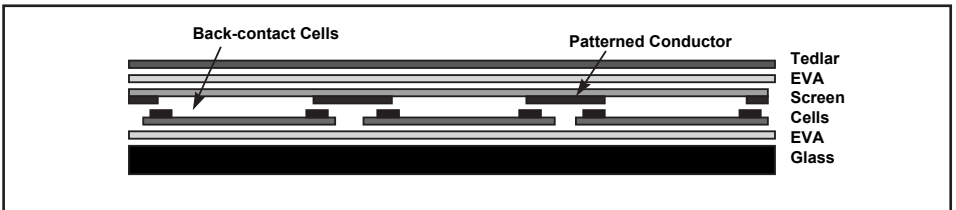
Exploded side view of conductors-on-screen monolithic module assembly option.
